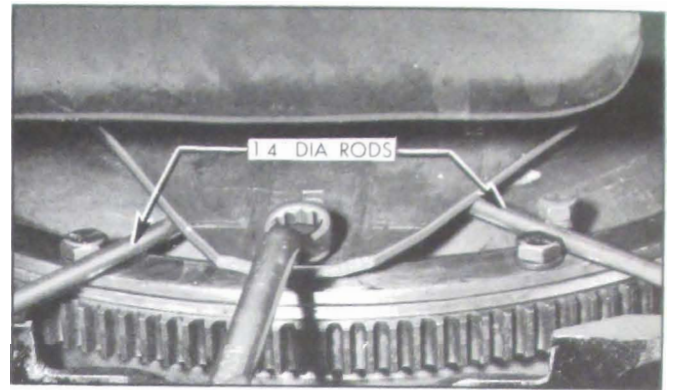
Bending Flywheel Leg Toward Pump Cover
